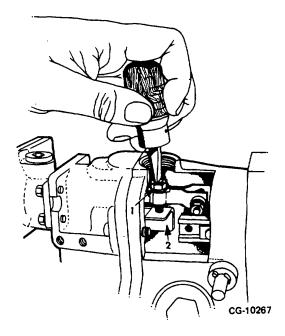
Adjusting Excess Fuel Rack Position (Governor Housing Cut-Away for Illustration)
